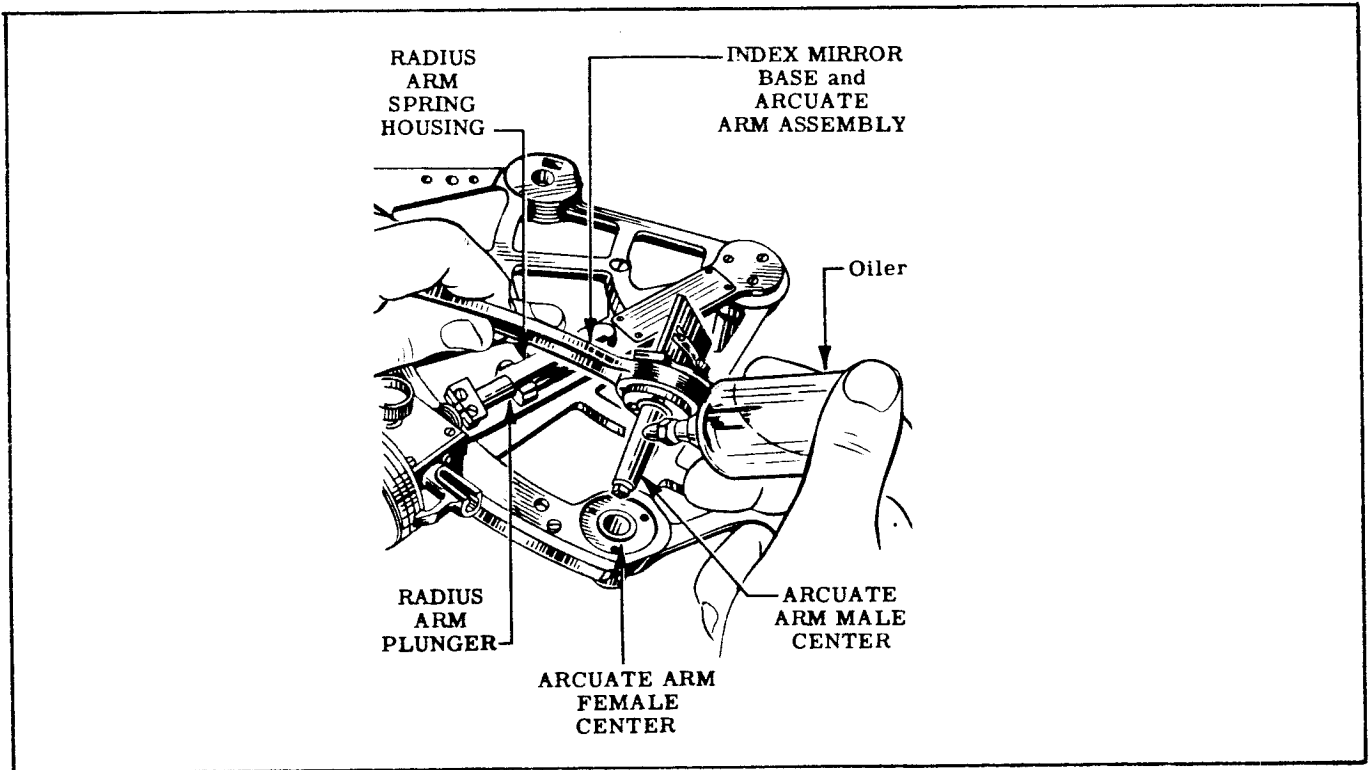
Assembling the Index Mirror Base and Arcuate Arm Assembly
